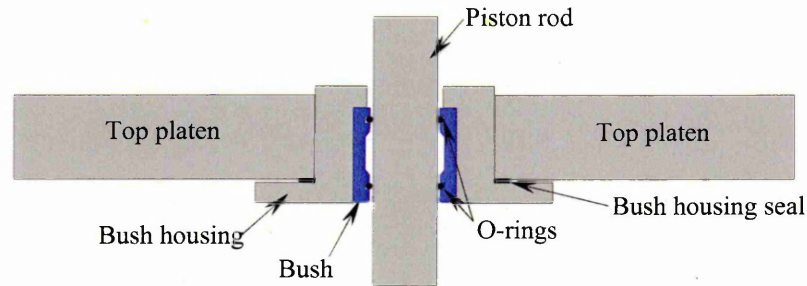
Top plate, piston bush, housing, o-ring and piston rod section.
